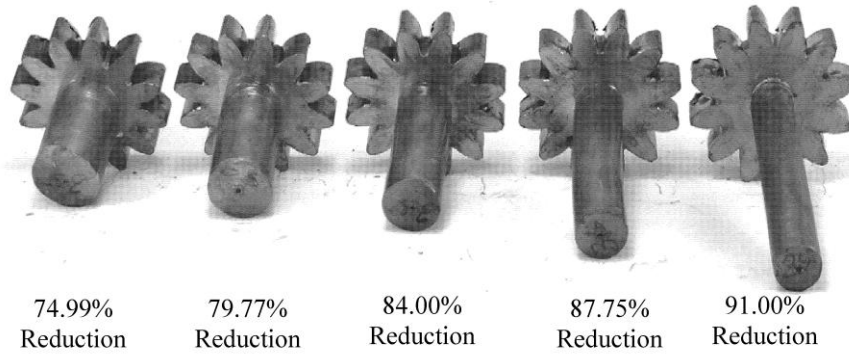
Extruded forward extrusion-forging 12-tooth gear head shaped product
